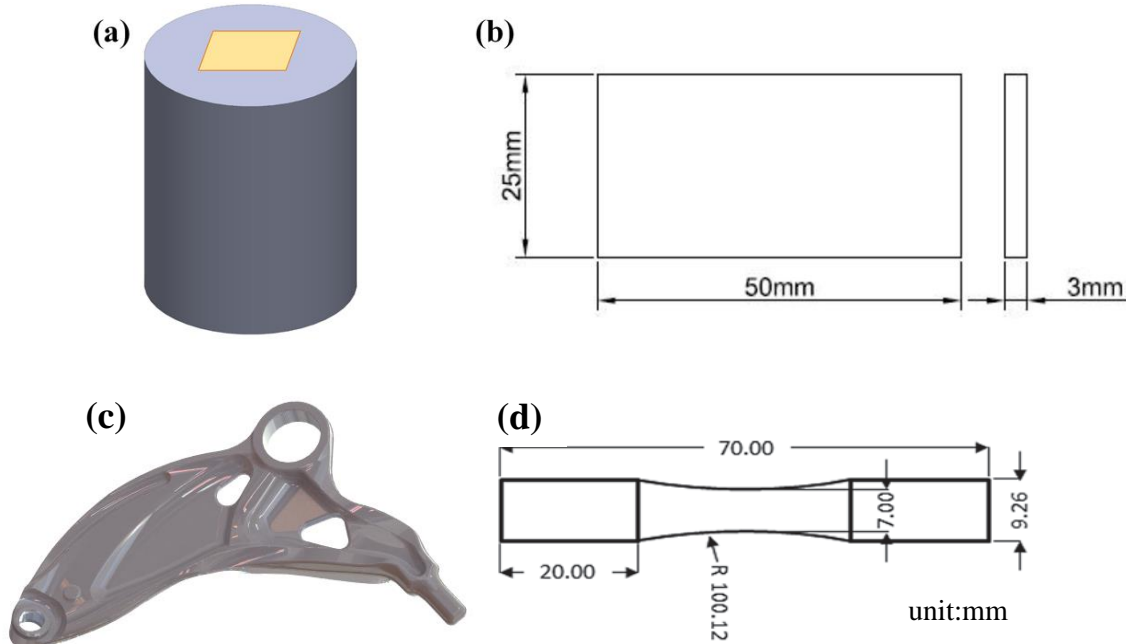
Illustration of the original billet and component used for machining test coupons and dimensions of coupons: (a) cast billet (the rectangular area shows an example of the flat specimen cut from the billet); (b) flat coupon for screening tests; (c) extrusion-forged front lower control arm; and (d) cylindrical specimen for fatigue tests
